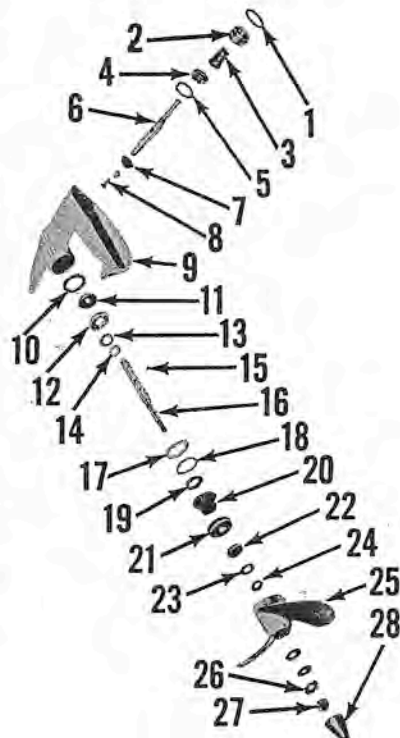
Exploded view of lower unit gearcase and associated parts.
